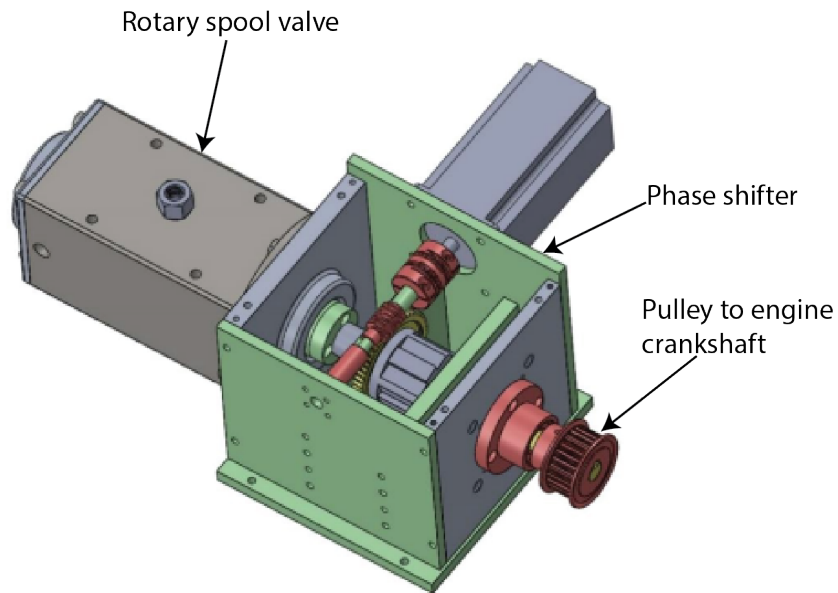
Chermesnok’s spool valve and phase shifter assembly [12]
